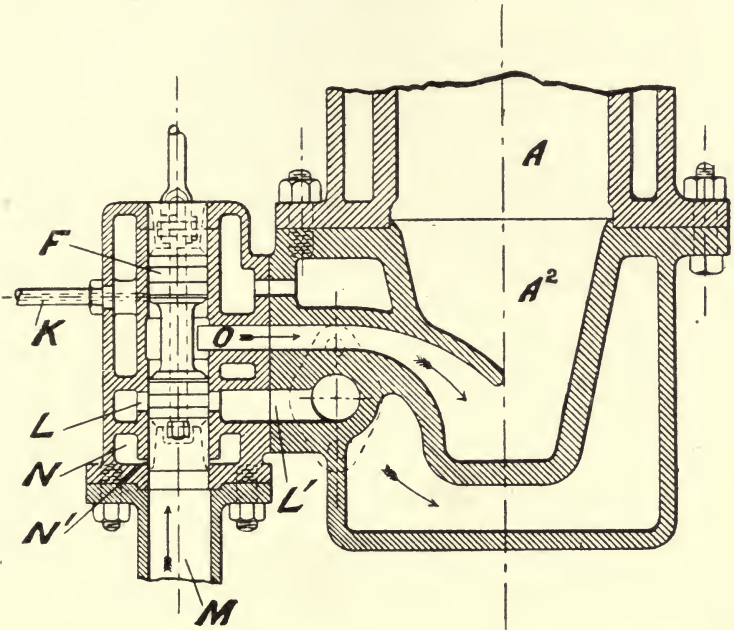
Fawcett Gas Engine (sectional plan of combustion chamber).
